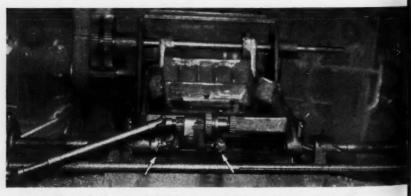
Boring the shaft holes in the bed for a 12x18-in. Gordon press.
